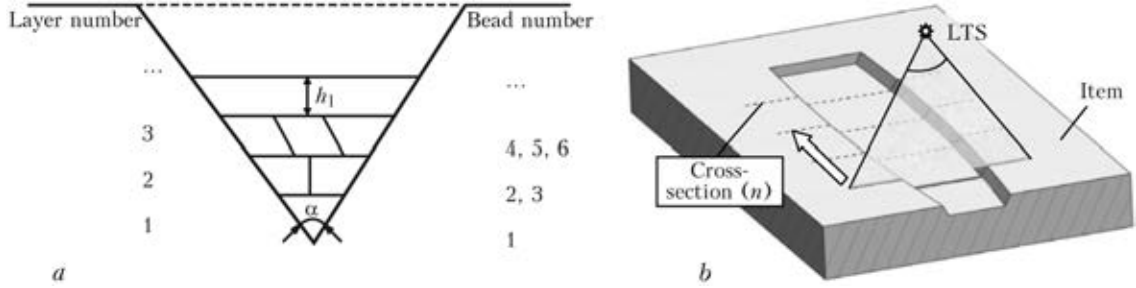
Schematics of multipass welding: *a* – filling of V-shaped groove of constant height layer (α – groove angle; h_1 – layer height, cm); *b* – filling the cut-out area in the item (longitudinal welds)
